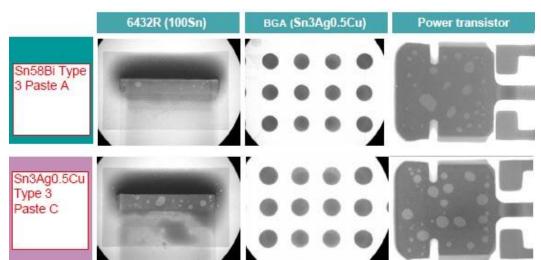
Sn58Bi paste A versus Sn3Ag0.5Cu paste C voiding on soldered 6432 [2512] chip, BGA and Power transistor components.
